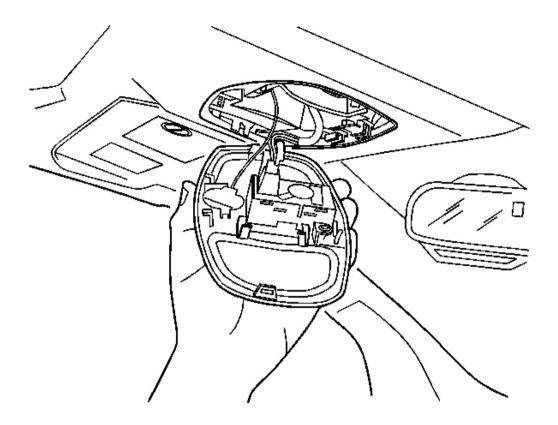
Removing/Installing Reading Lamp Bulb Courtesy of GENERAL MOTORS CORP.
